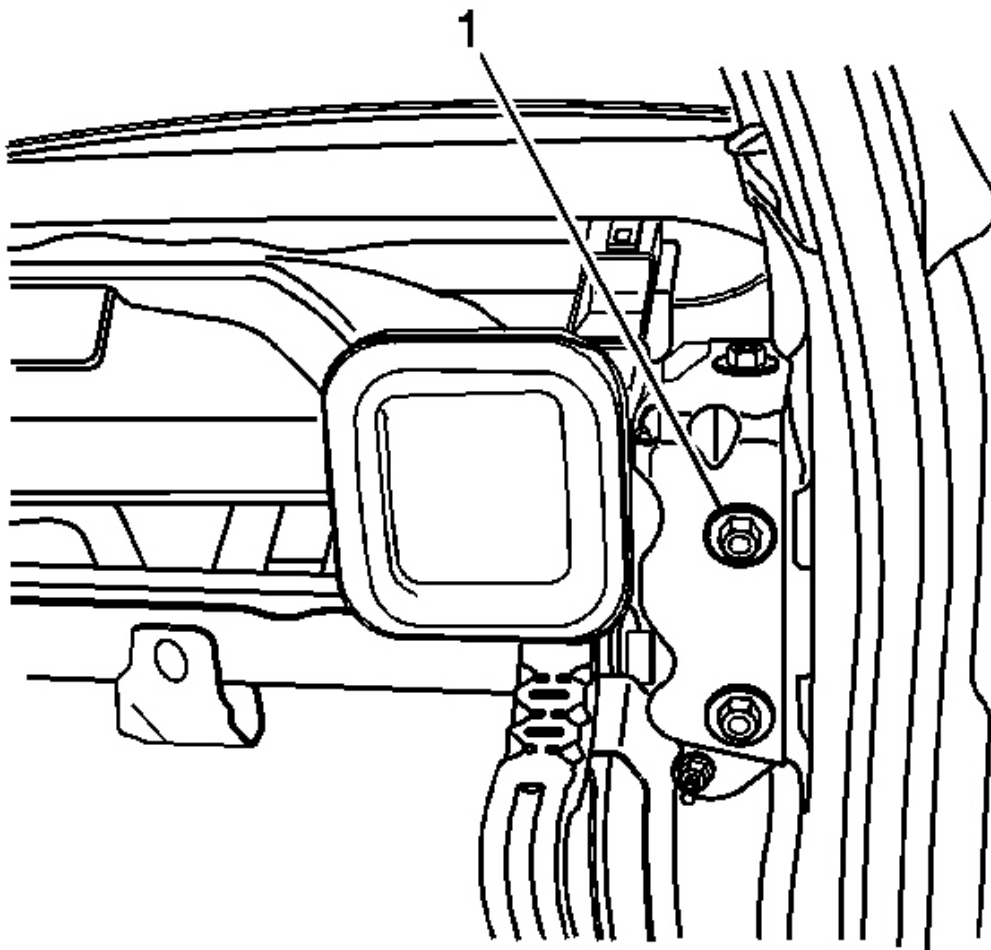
View Of Steering Column Support Bracket Bottom Retaining Bolts
